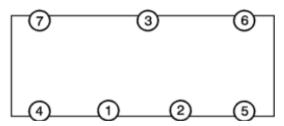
Valve Cover Retaining Bolt Tightening Sequence.
